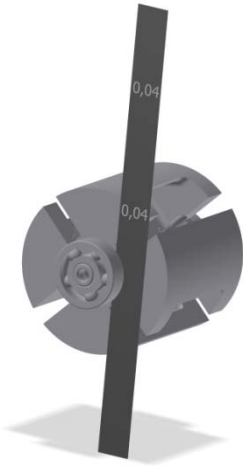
Measuring the clearance between the vane and the vane slot. (J5015E and J5023E)
